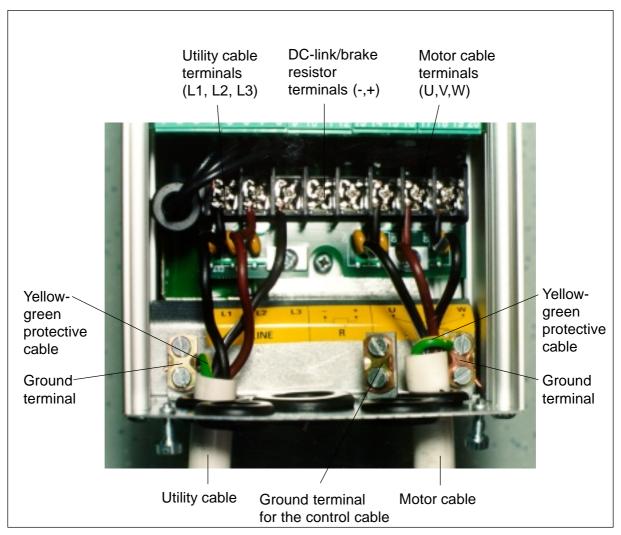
Cable assembly compact NEMA 1: CXS 0010-0030HP V 3 5.
